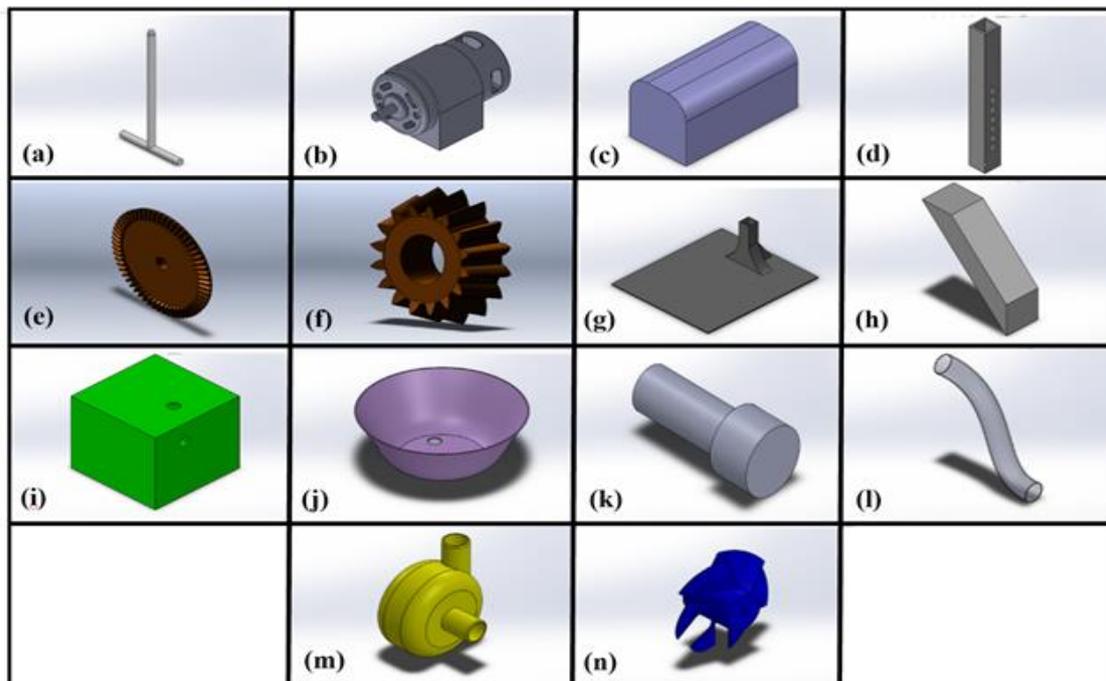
Machine parts by Solid Work 2019 (a)spreader, (b) DC motor, (c) Casing, (d) Square bar, (e) Bevel gear, (f) Pinion bevel gear, (g) Base, (h) Support rib, (i) Frame, (j)Bowl, (k) Fastening pin, Transferring tube, (m) Centrifugal pump, (n)Impeller fan
